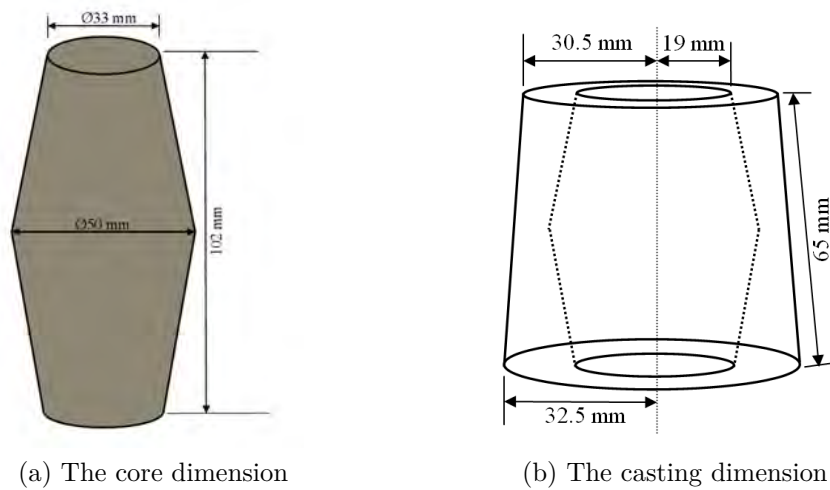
The core and casting dimensions for the horizontally-parted moulds.
